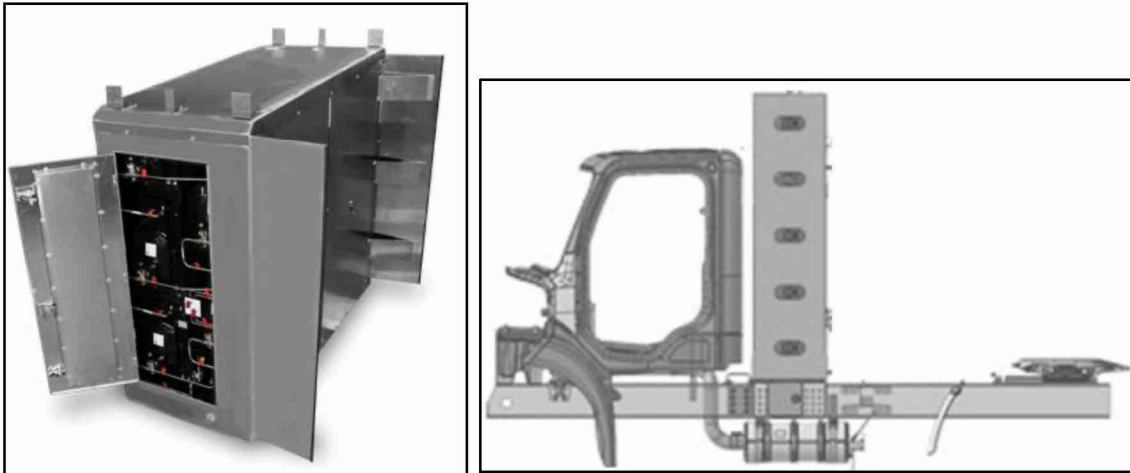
CNG Back Of Cab Fuel Tank Brackets Assembly
